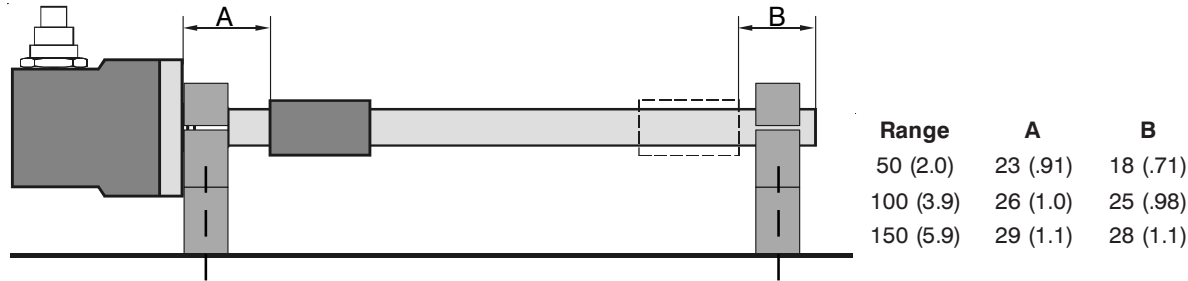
Clamping / mounting areas of vipSENSORS
